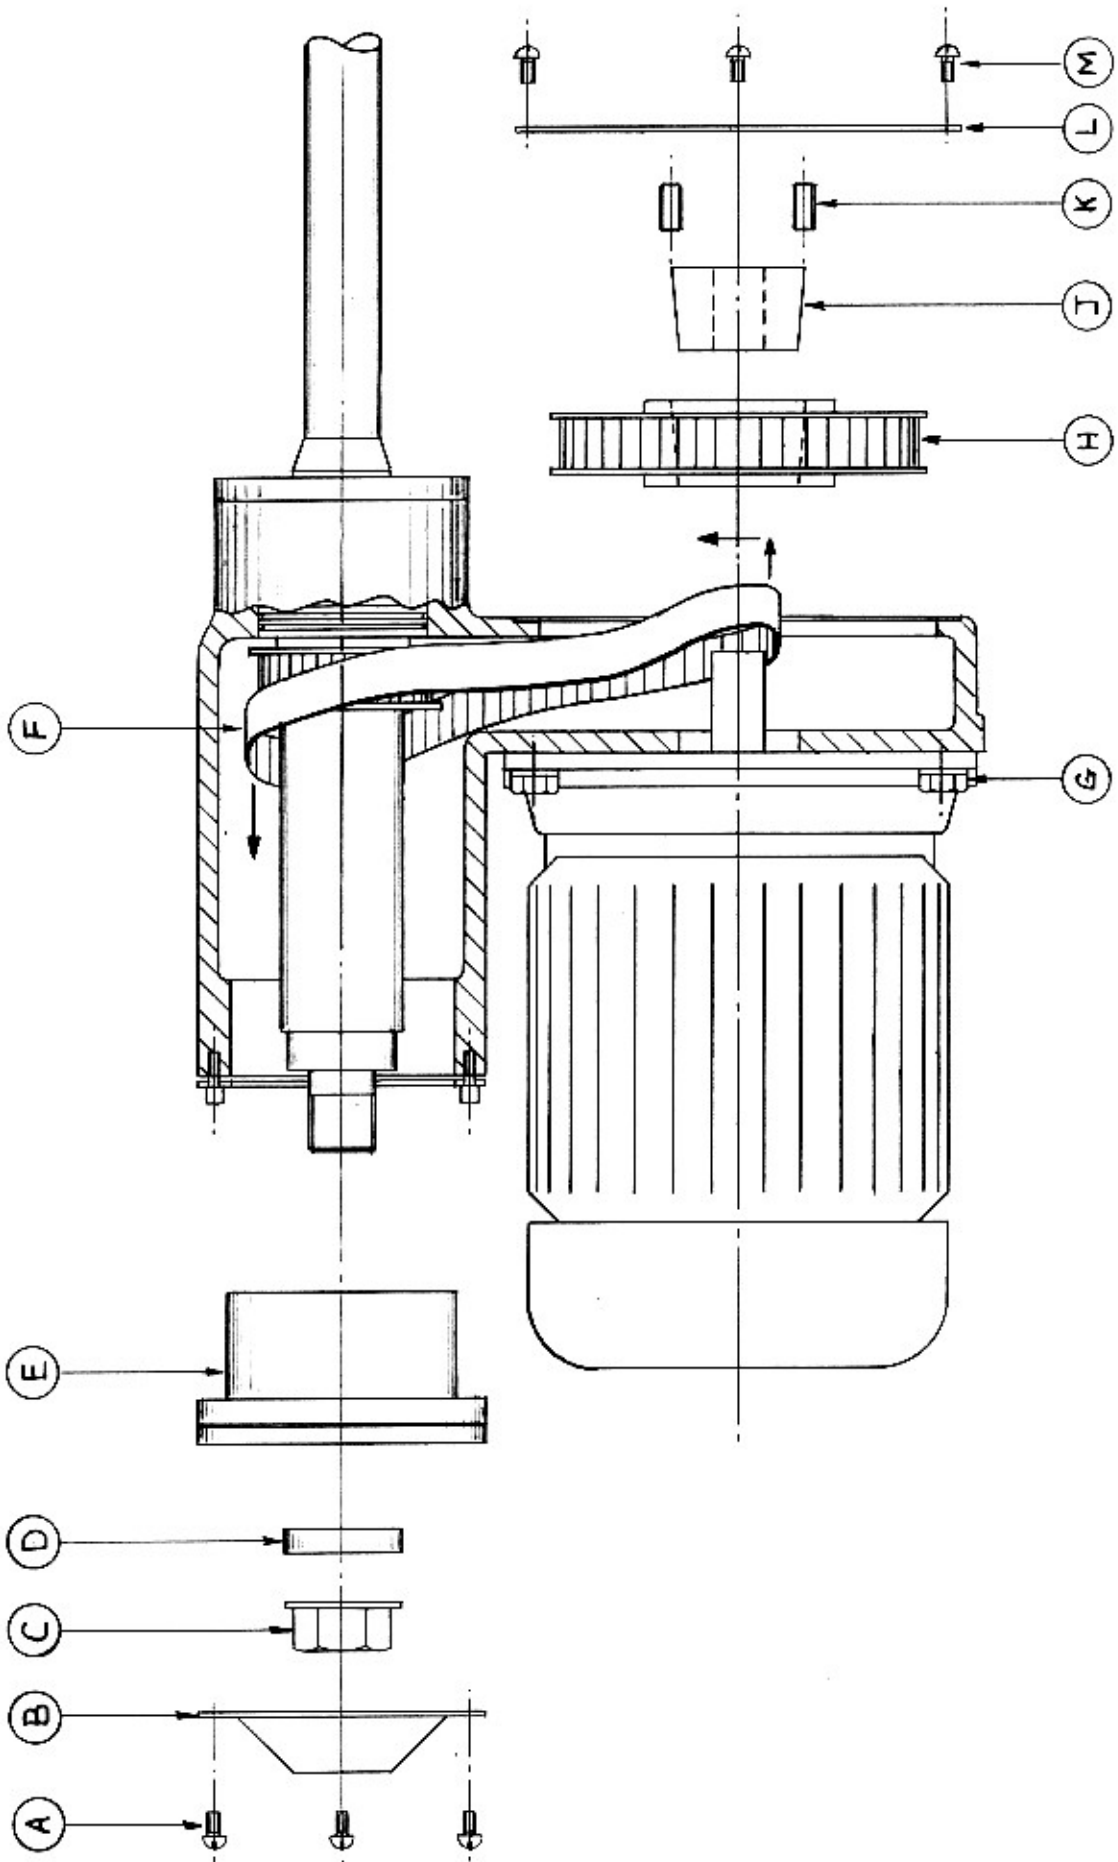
HORIZONTAL HEAD DRIVES - BELT REPLACEMENT
